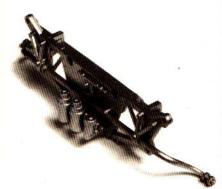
show construction of Front Suspension. Each figure indicates points which parts are to be This complicated Front Suspension using Torsion Bar system will require builder's careful attention and patience.
